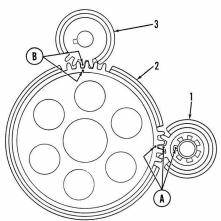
The crankshaft gear (1) must be installed on crankshaft splines with timing marks aligned. The three marks (A) on crankshaft, gear (1) and primary drive gear (2) should all be aligned when mark on alternator drive gear (3) is aligned with top mark on primary drive gear (2) as shown at (B).
